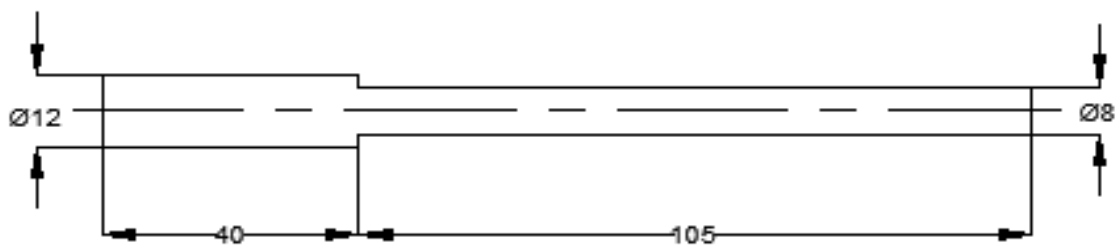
The Standard fatigue testing specimen with dimensions required by the Fatigue Testing Machine.
